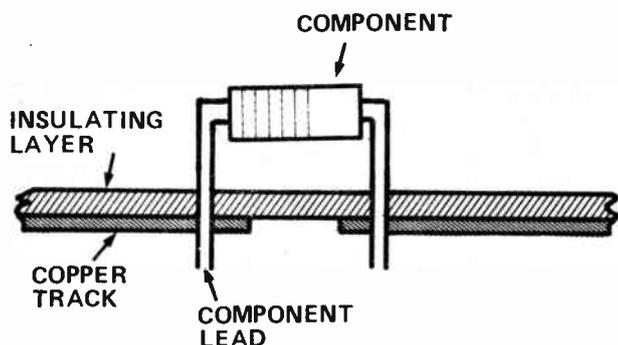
Section of a circuit board showing the insulating layer, thin copper strips and a component
